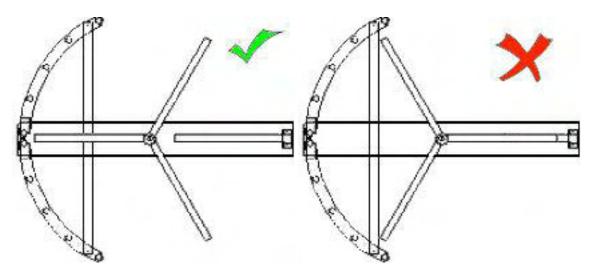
Figure J: Proper rotor alignment (left) vs. improper rotor alignment (right).
